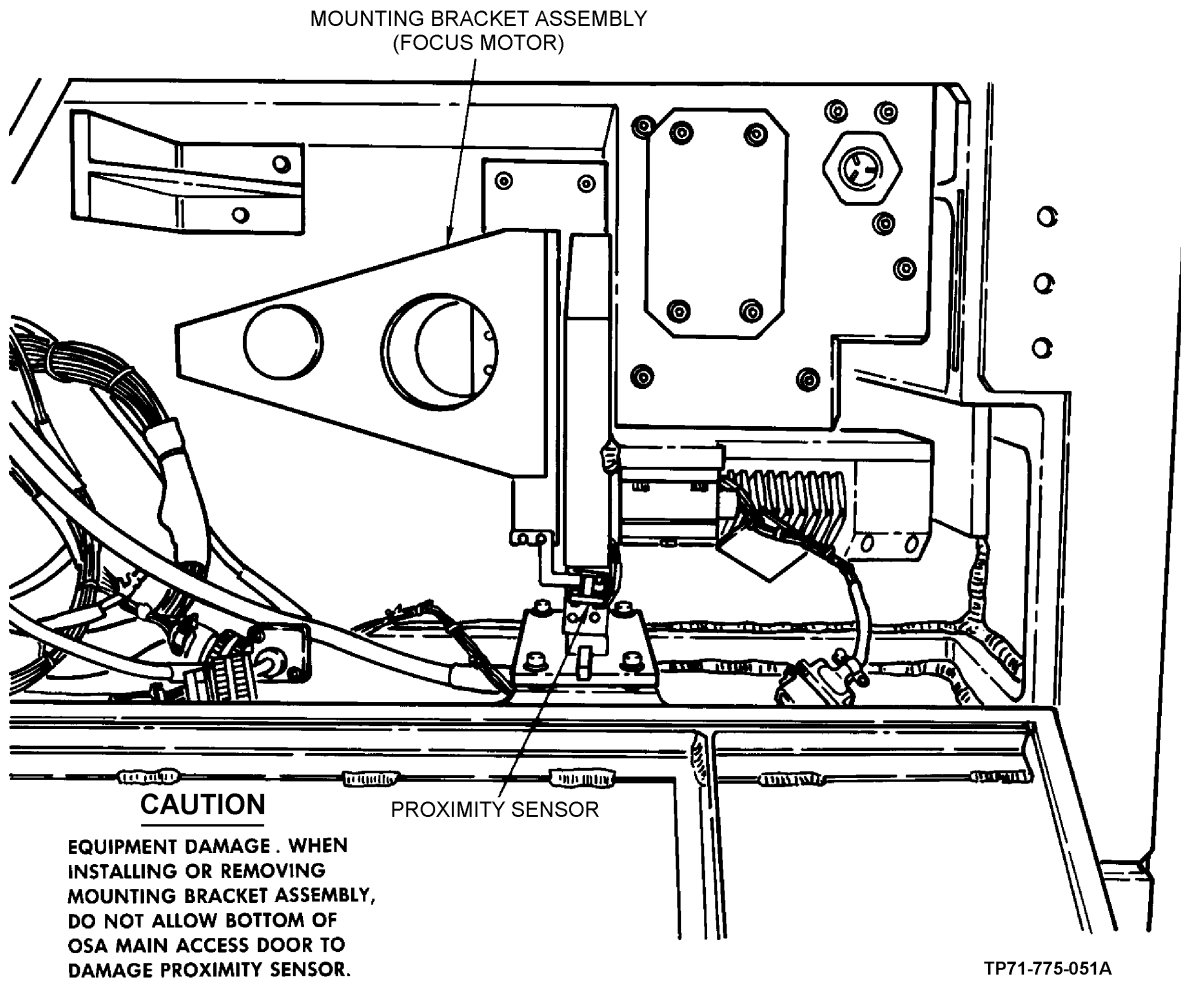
Mounting Bracket Assembly (Focus Motor) in Installed Position
